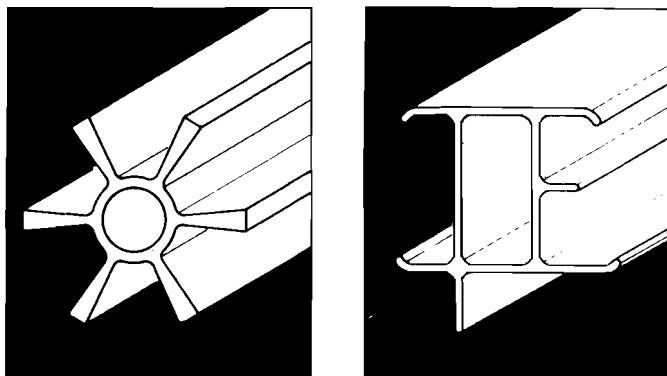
TYPICAL PARTS EXTRUDED THROUGH PORT-HOLE DIE
